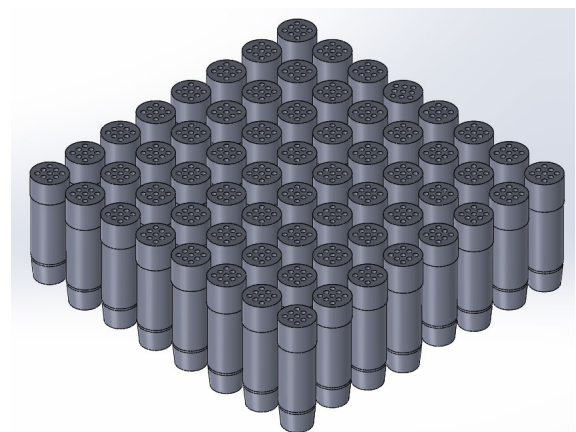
Rod insert assembly design to be used in below WMS plane.
